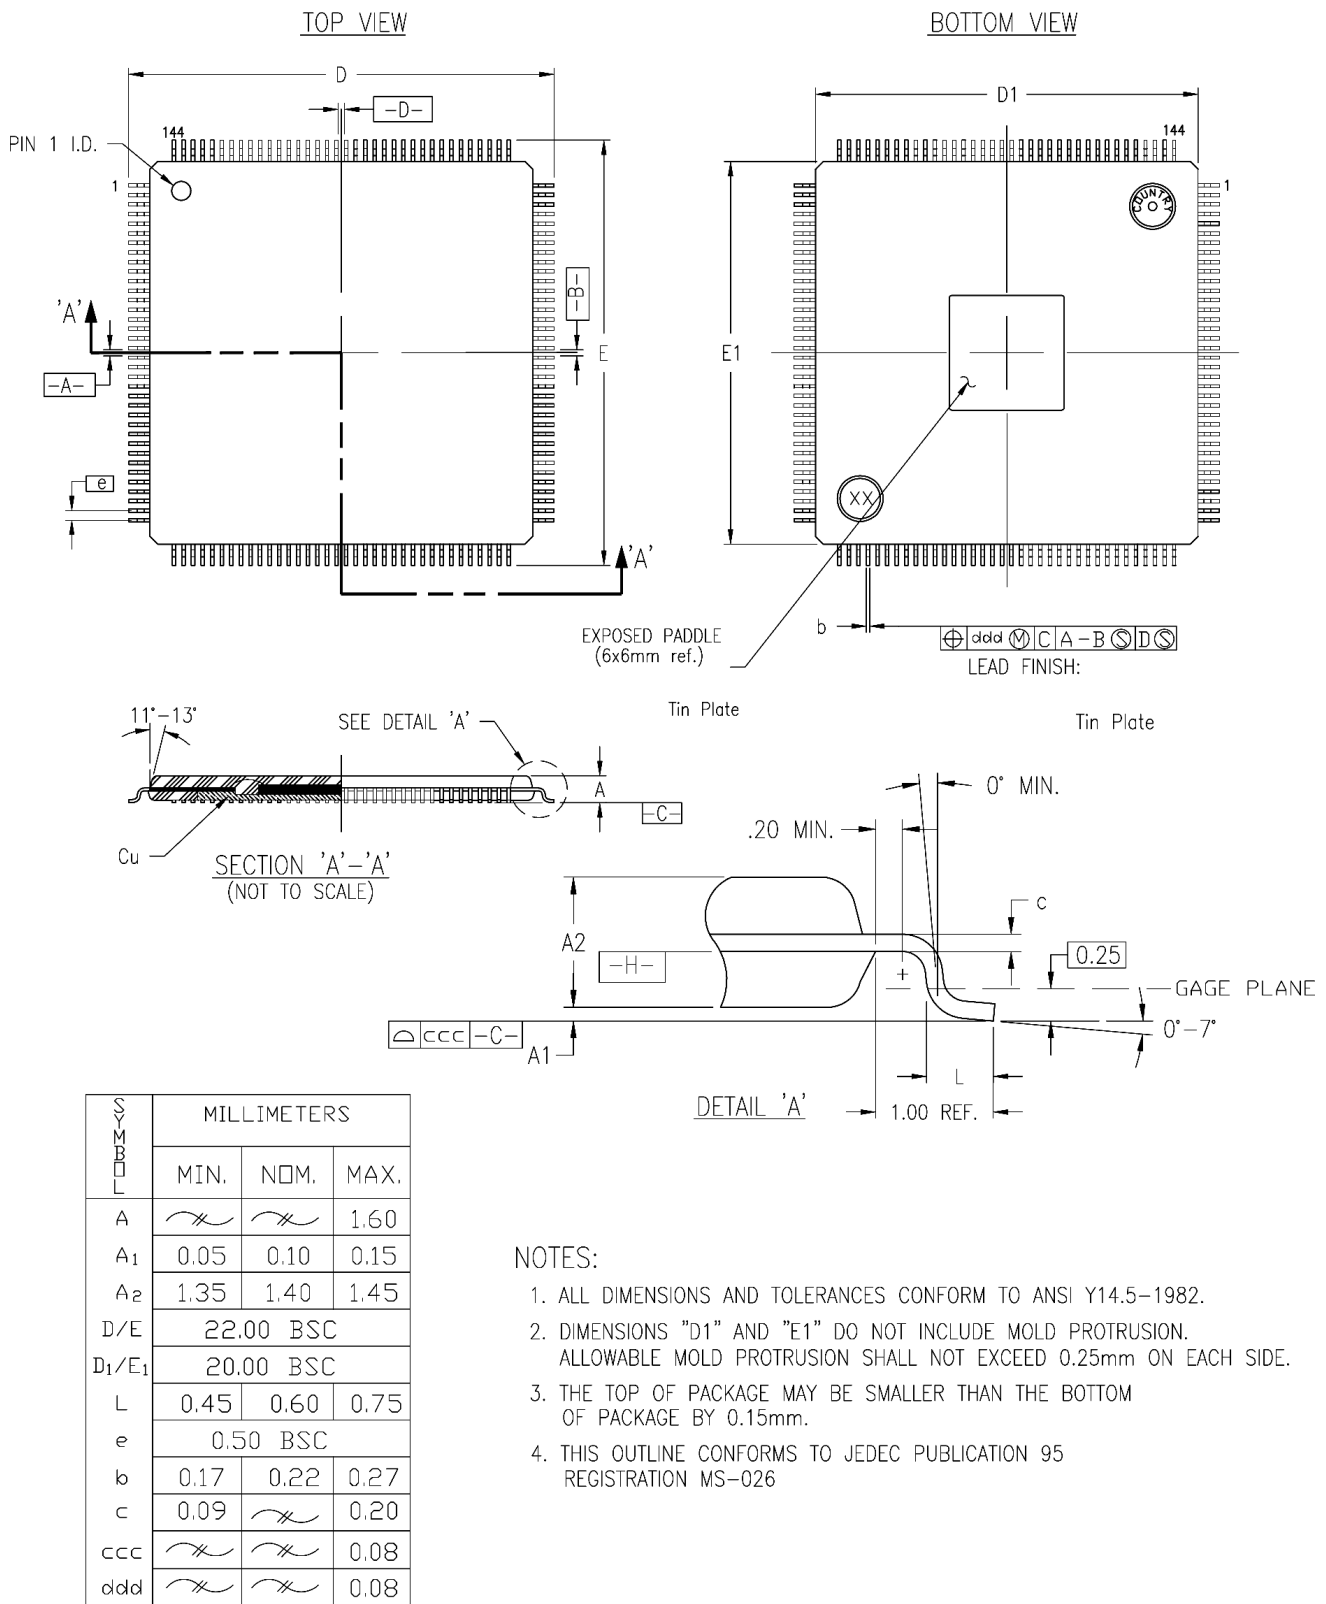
XC3S50AN ES Package Dimensions with Exposed Pad
